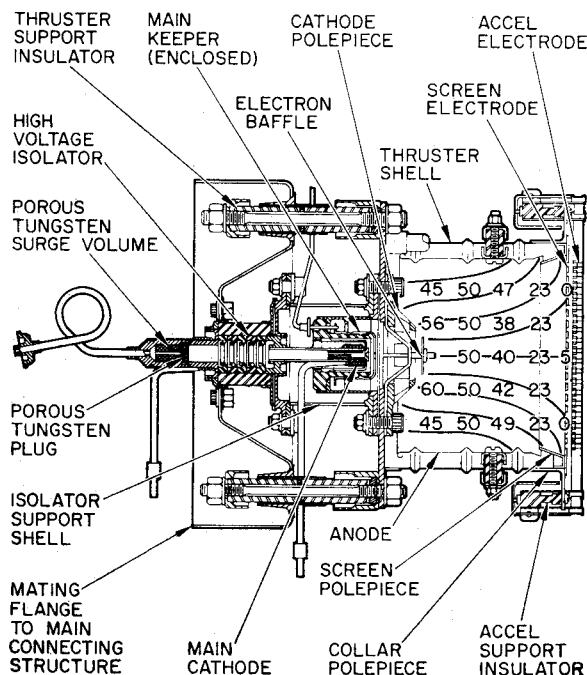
Discharge chamber with main-cathode subassembly attached. The magnetic field shape is shown with values of the axial field component indicated in gauss.
